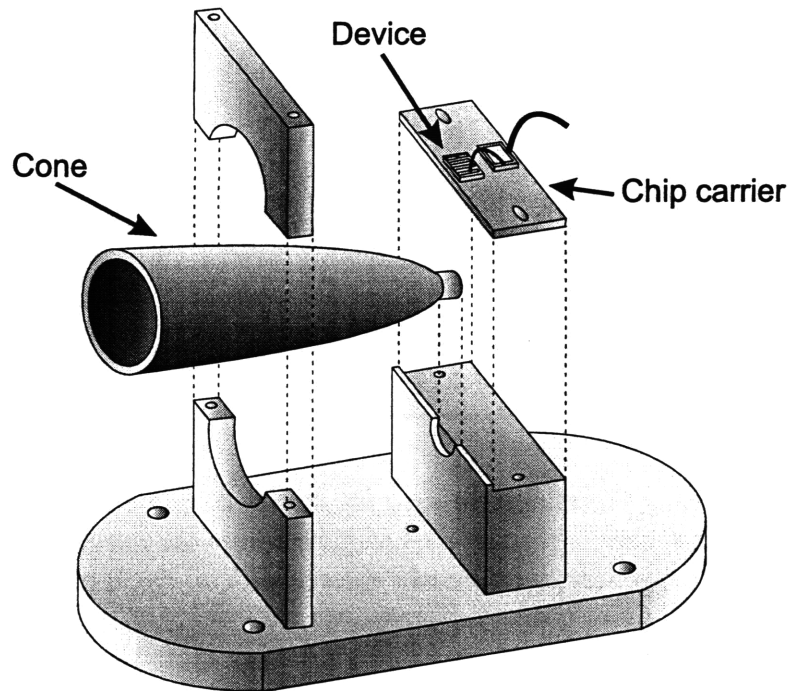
Copper mount used to hold electroformed cone and chip carrier with device. The mount was screwed to the cold plate, providing good heat sinking for the device. All metal-metal surfaces were plated with indium to ensure maximum thermal conductivity. A temperature sensor (not shown) was attached to the mount just below the chip carrier.
